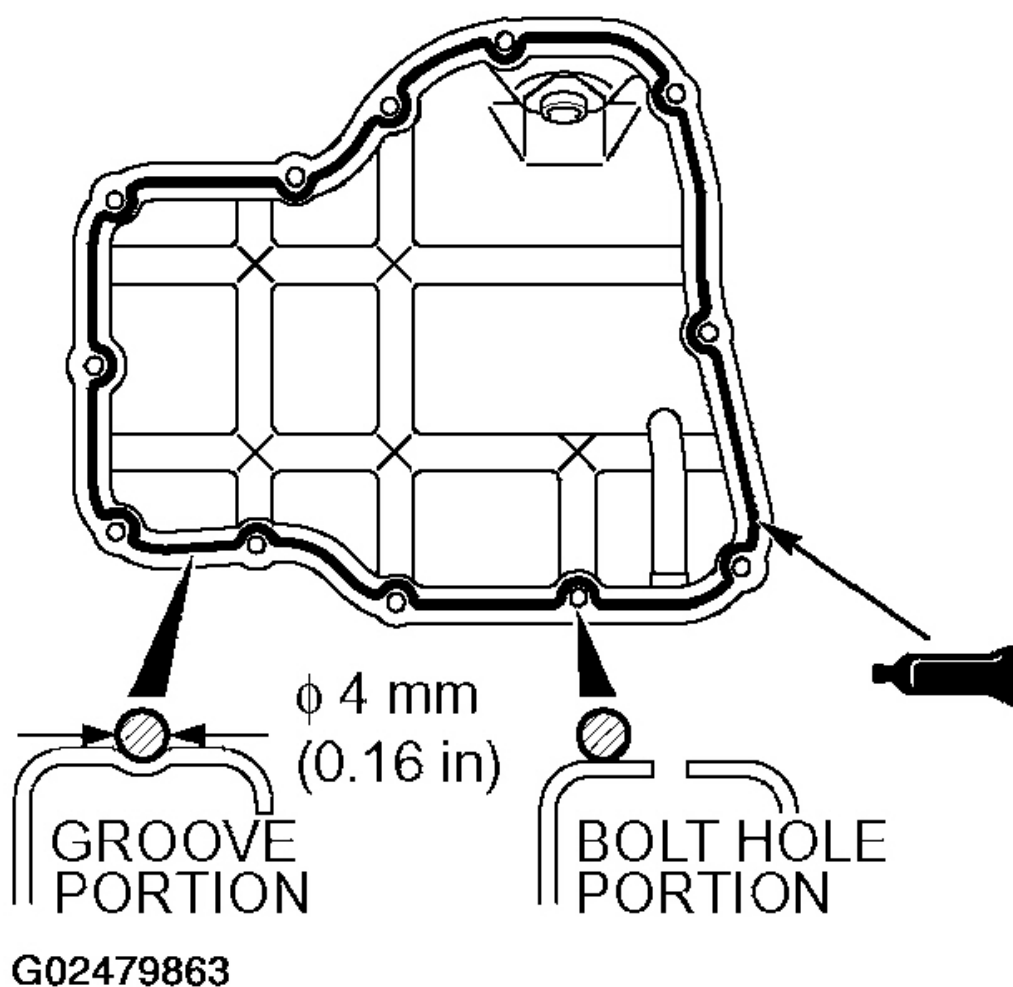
Applying Bead Of Sealant To Mating Surface Of Engine Lower Oil Pan
